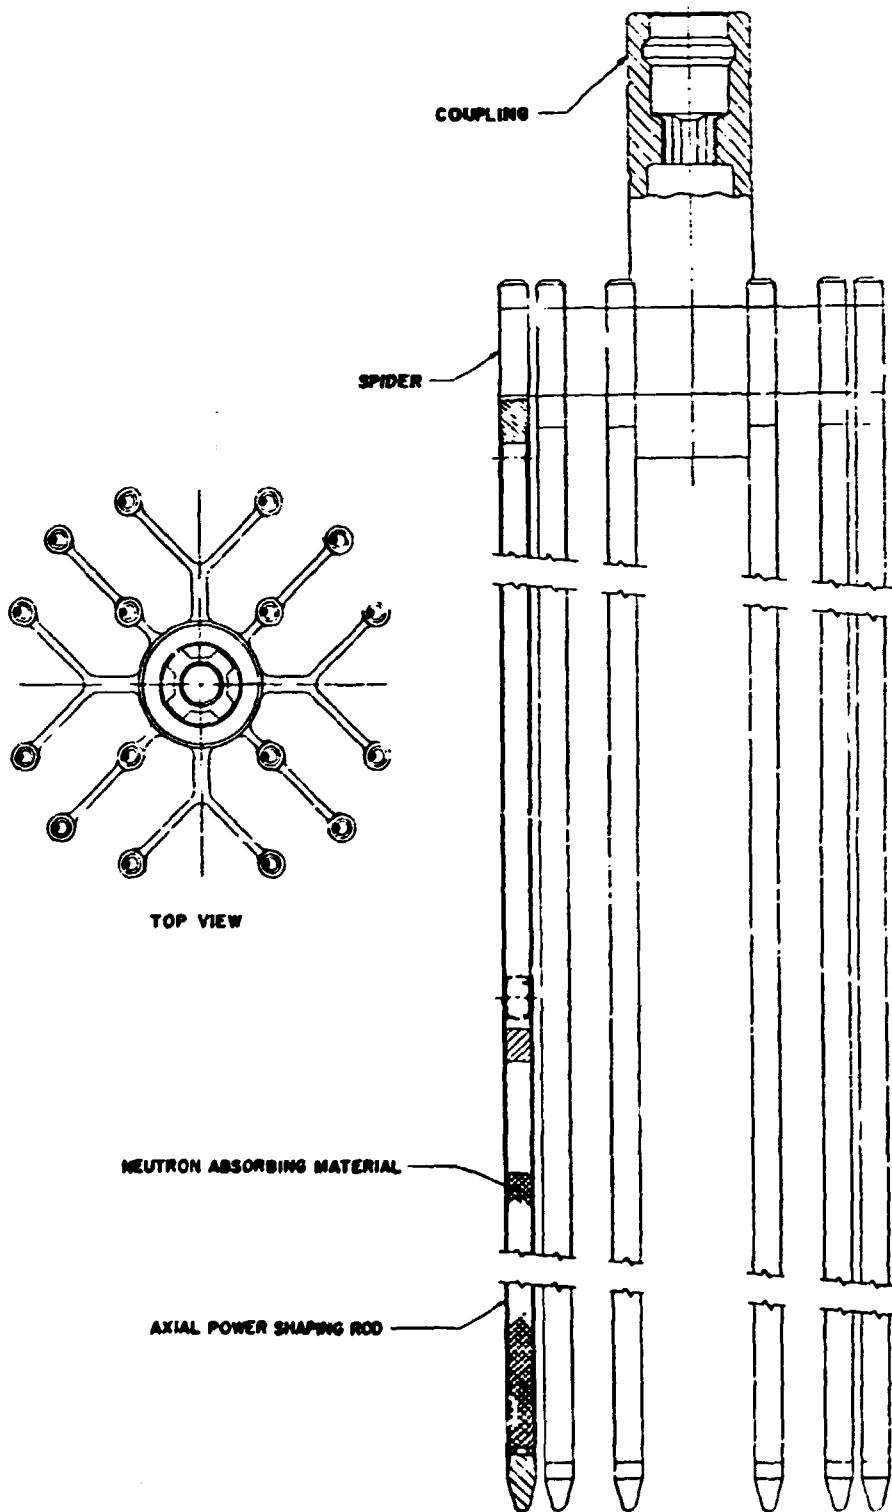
Axial Power Shaping Rod Assembly
